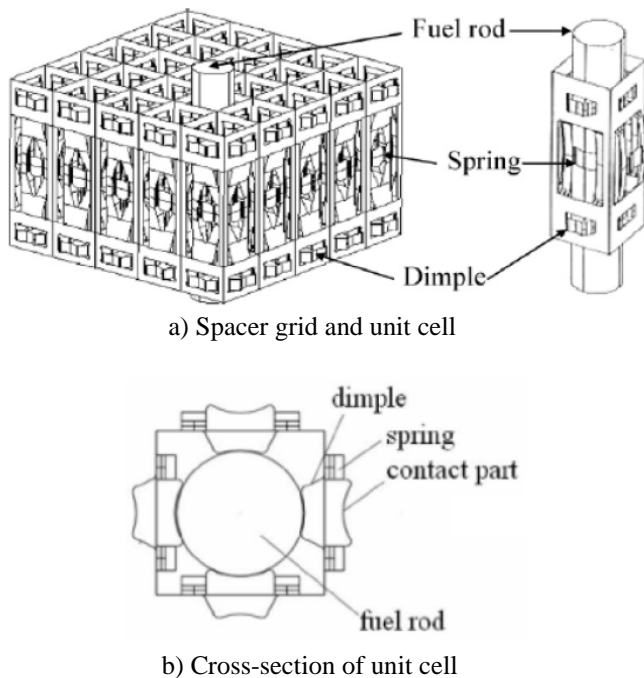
Spacer grid and cross-section of spacer grid unit cell
